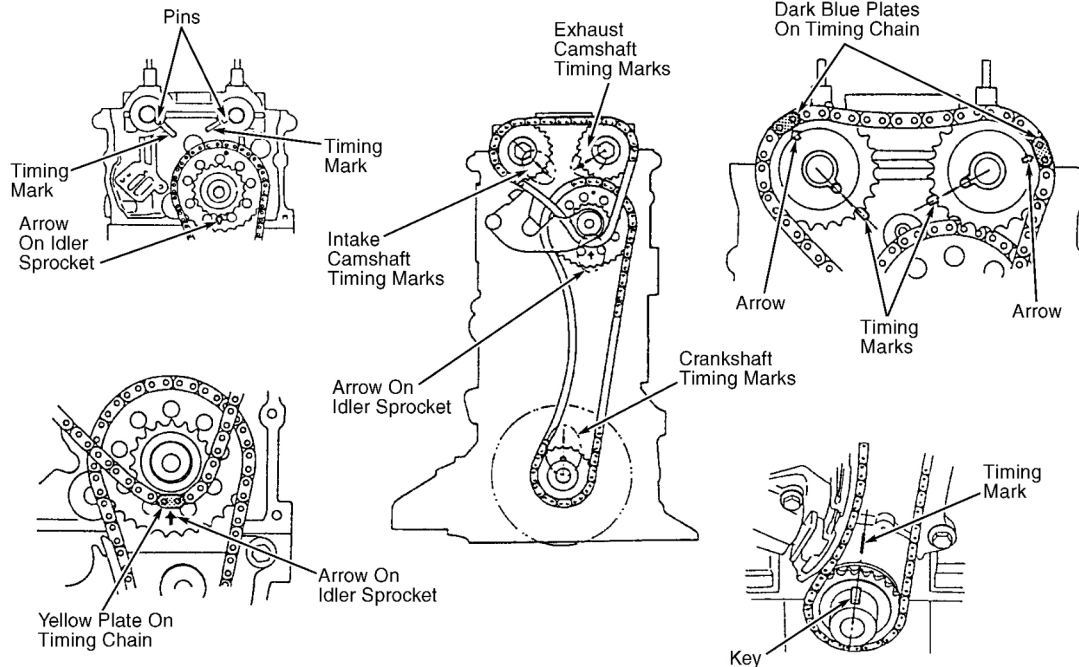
Aligning 2nd Timing Chain & Sprockets
